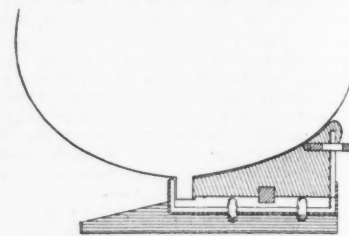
Special Chock for Holding Boats Used on the Steamer "Kaiser Wilhelm der Grosse."
